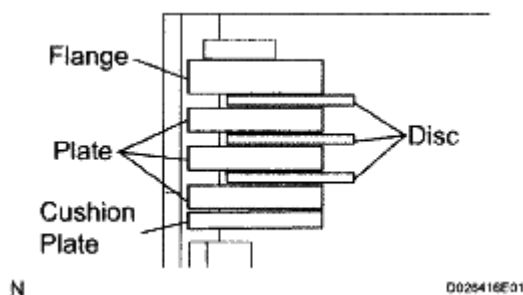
Identifying Cushion Plate, Plates, Discs And Flange
